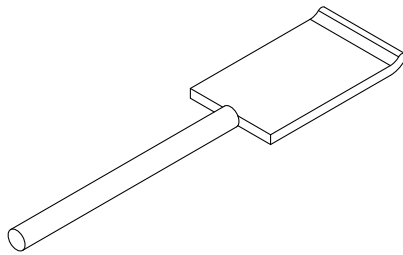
Not-to-scale drawing of the quartz sample holder. The sample holder features a 3.18 mm rod connected to a 1.59 mm thick sample plate. The sample plate features a lip at the far end to prevent samples from sliding off the front. Note that the rod has been shortened for this illustration. A detailed manufacturing drawing of the sample holder is provided in Appendix A.
